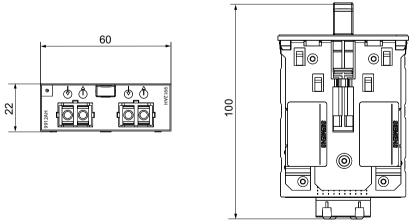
MM900 dimension drawing 7: SC RJ ports optical
